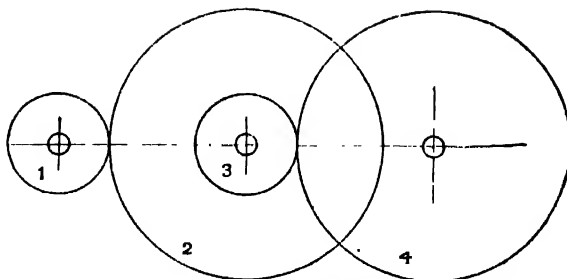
GEAR TRAIN. An arrangement of gears to give a large speed reduction.
